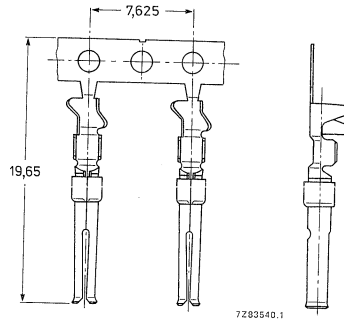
Crimp contact sockets for AWG20 to AWG26 wires, on band.
